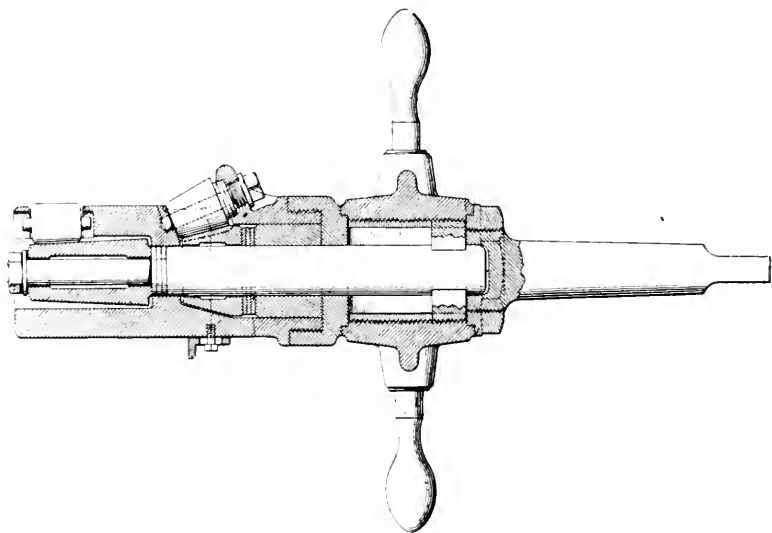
Lovekin patent expanding and flaring tool with cutter for all piping.
